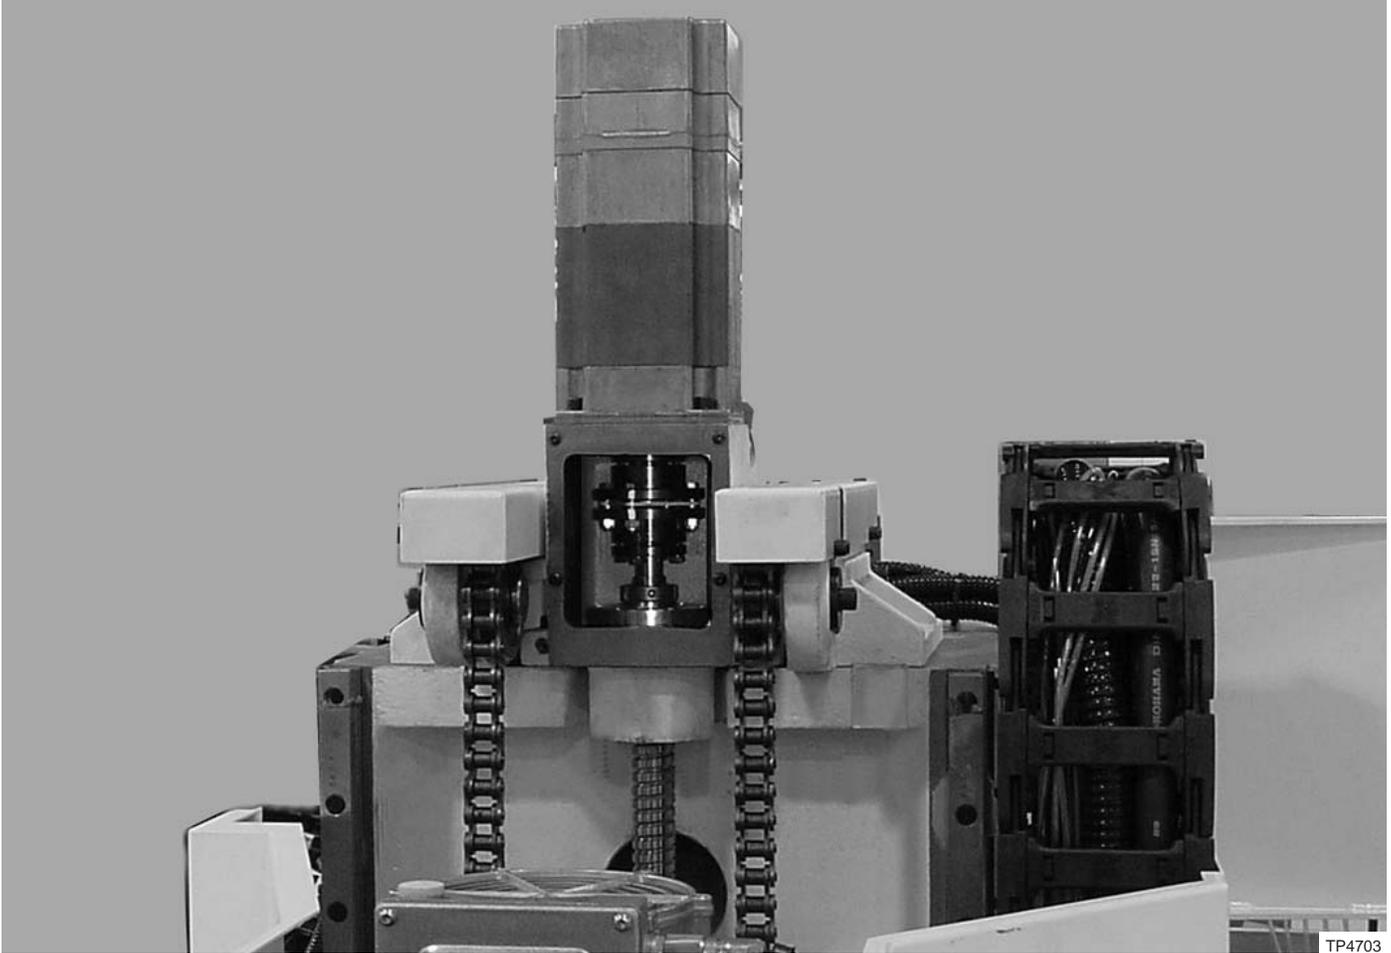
Z Axis Drive Motor (Fanuc),
